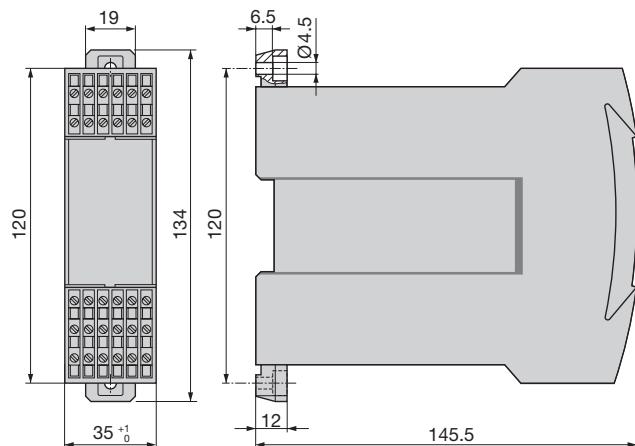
Transmitter/alarm unit with the screw hole brackets pulled out for wall mounting.
